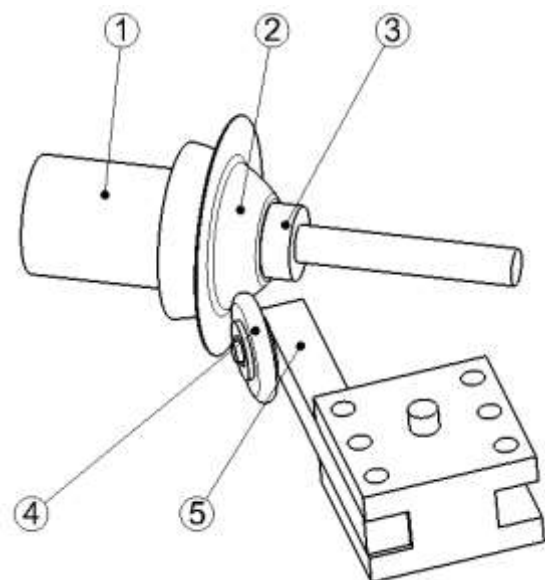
The experimental setup of metal spinning: 1– mandrel, 2– blank, 3– clamp, 4– roller, 5– roller lever.
